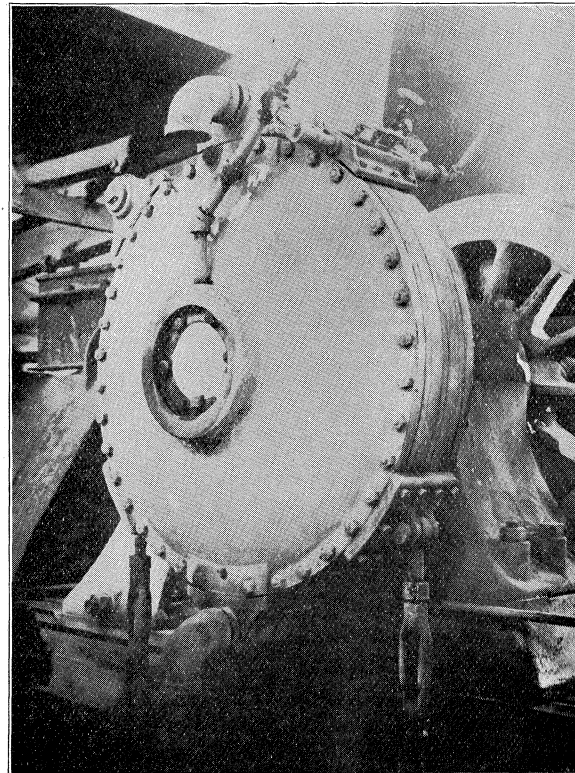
An Exterior View of One of the Brakes. The water piping and oil piping are removed. This view shows also one of the bearings and a supporting wheel.
